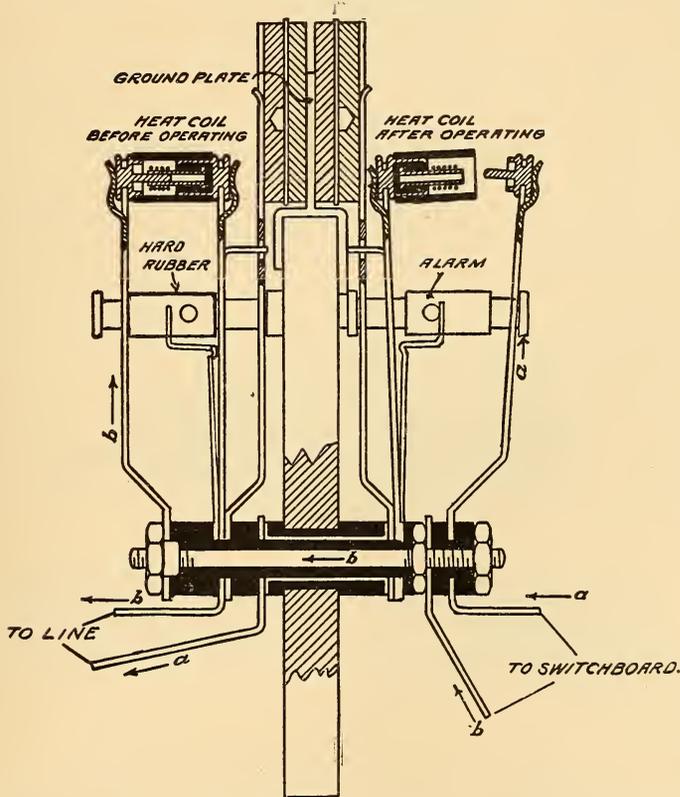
COOK COMBINED HEAT COIL AND CARBON ARRESTER.
